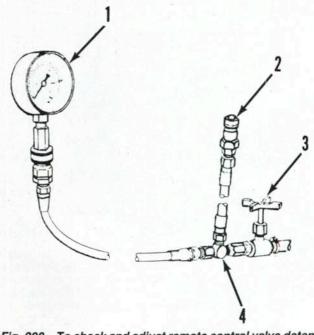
To check and adjust remote control valve detent pressure, connect a hydraulic flow meter or a pressure gage and shut-off valve with a tee fitting similar to that shown in "Raise" remote coupler. Route return hose from flow meter or pressure gage into oil filler tube on top of lift cover. Refer to text.
